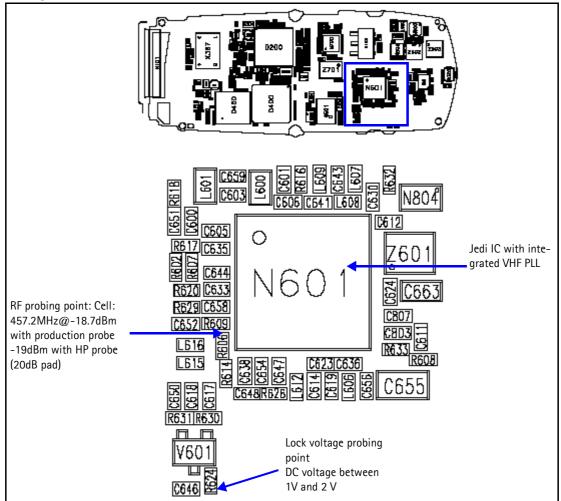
PWB, bottom side (top). A zoomed view of the testing points on the Tx VHF section (bottom).
